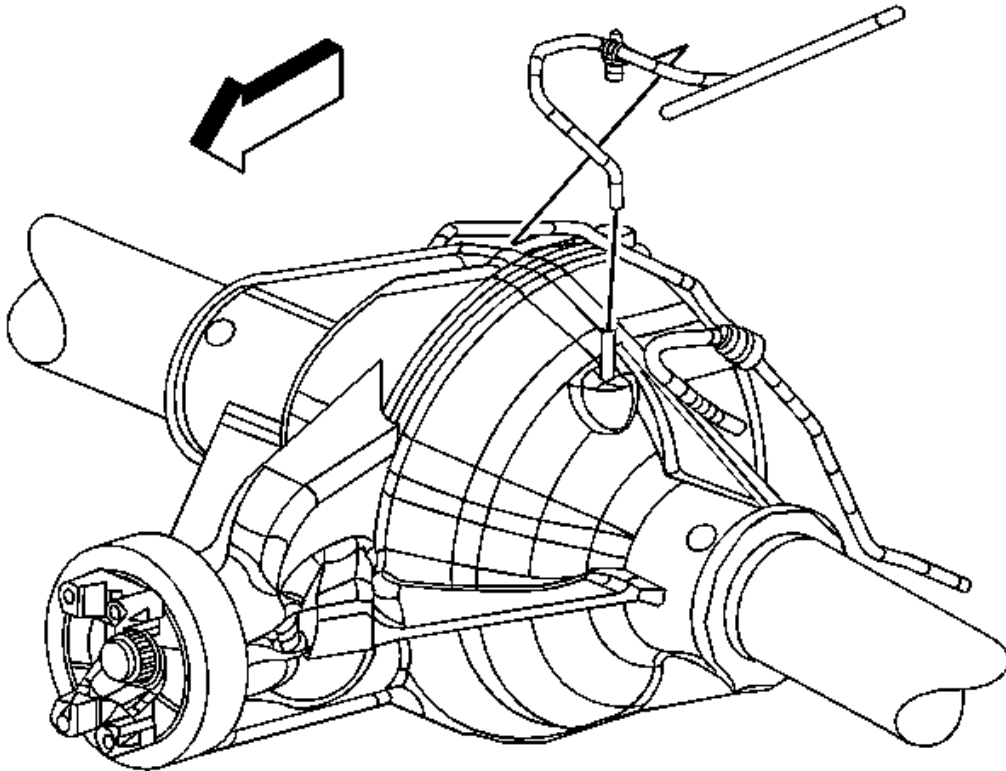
View Of Vent Hose Swivel Clip & Rear Brake Crossover Pipe
